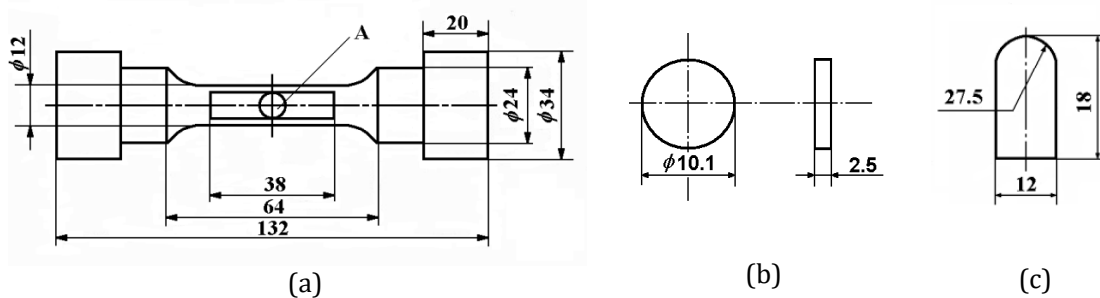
Geometry of the specimen (a), sample (b) and fretting test pad (c)
